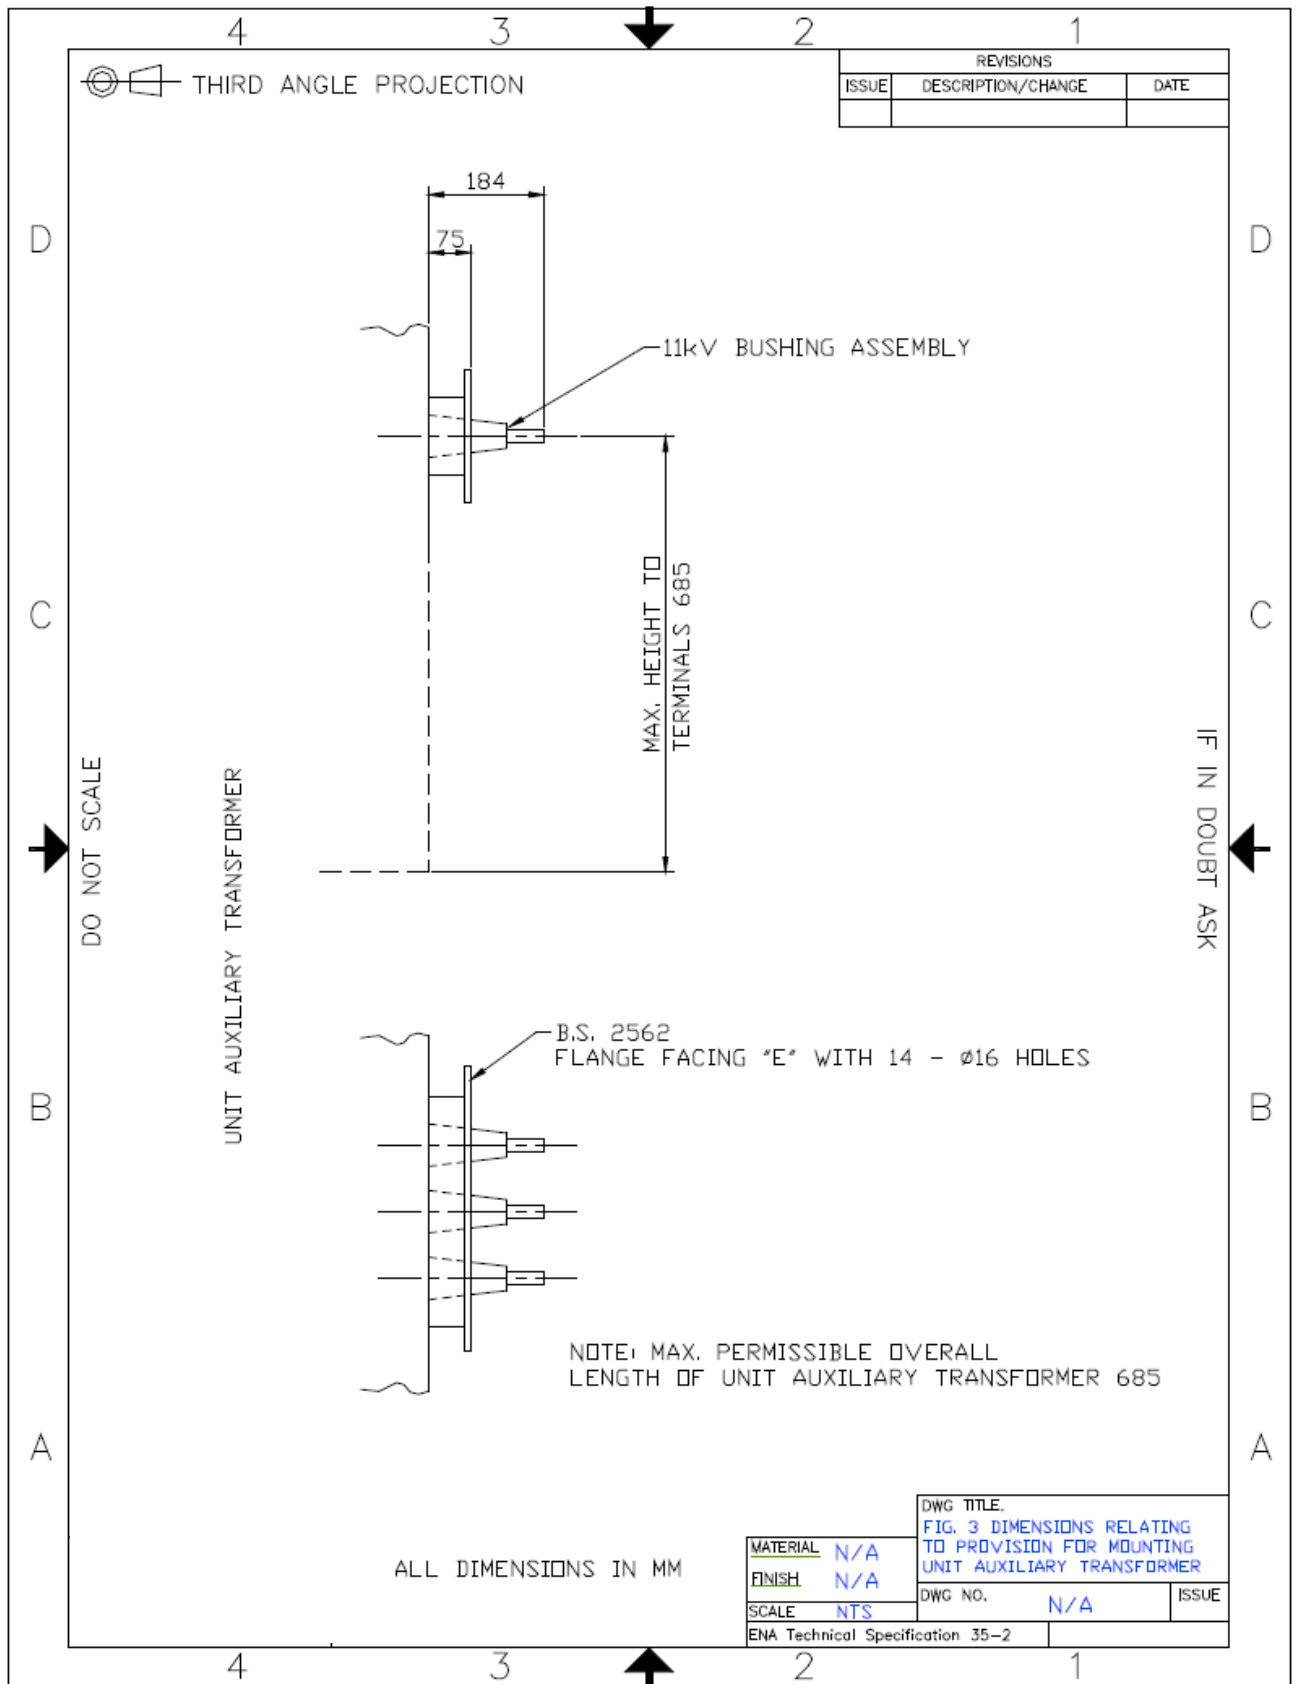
Dimensions Relating to Provision for Mounting Unit Auxiliary Transformer
